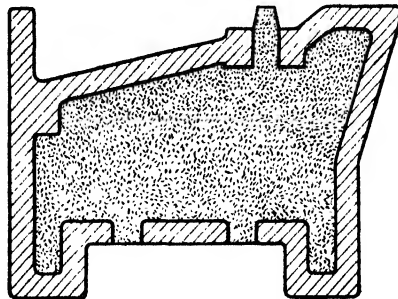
Section through aluminum-alloy cylinder head showing core print left to provide a vent and to permit removal of core sand when casting is cleaned.
